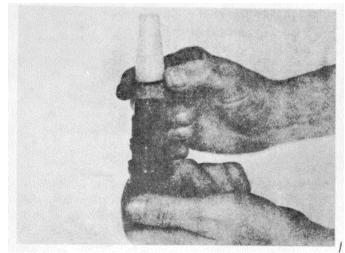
H-12. Installing O-Ring with Assembly Tool Inspect the barrel mating surface for nicks or 5. burrs. If damage is found, lap to repair.
